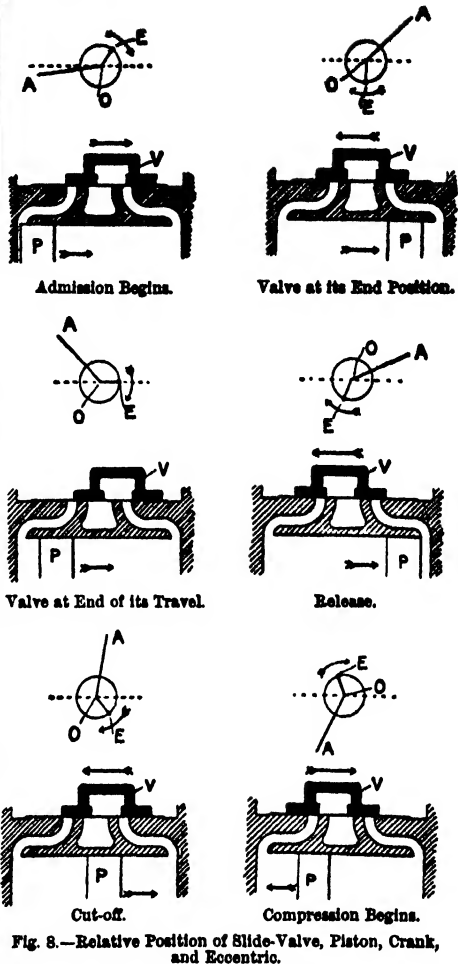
Relative Position of Slide-Valve, Piston, Crank, and Eccentric.
